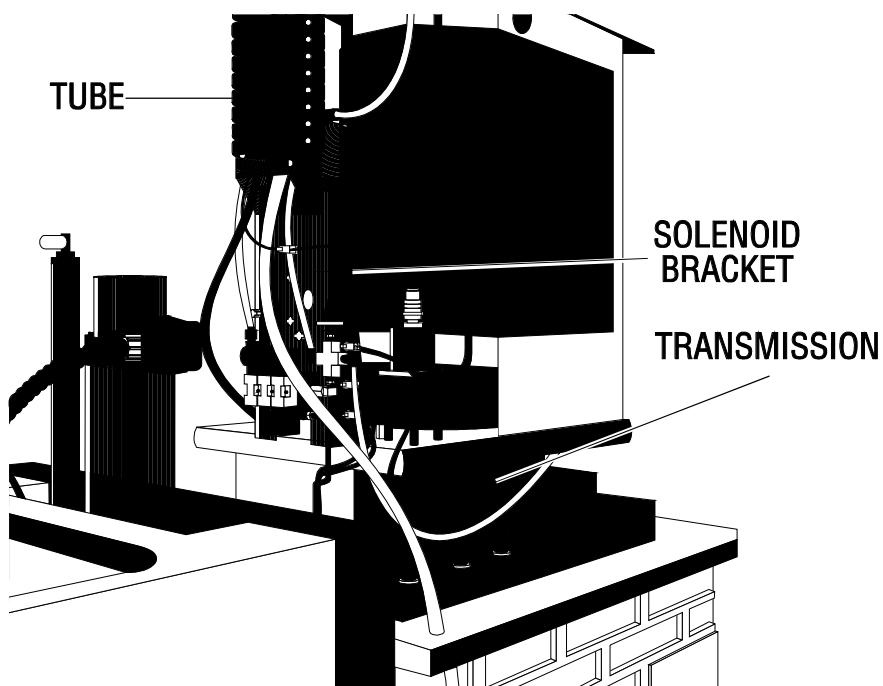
Spindle encoder installation (VF-1/VF-2).
